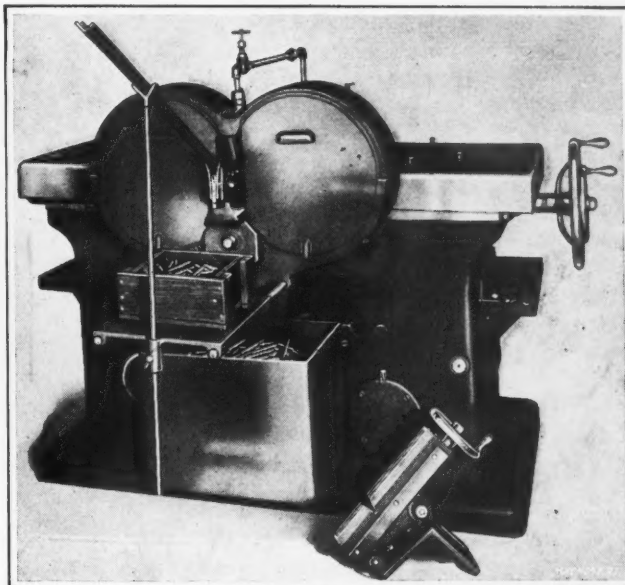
Heim Centerless Roll Grinder made by Ball & Roller Bearing Co.
